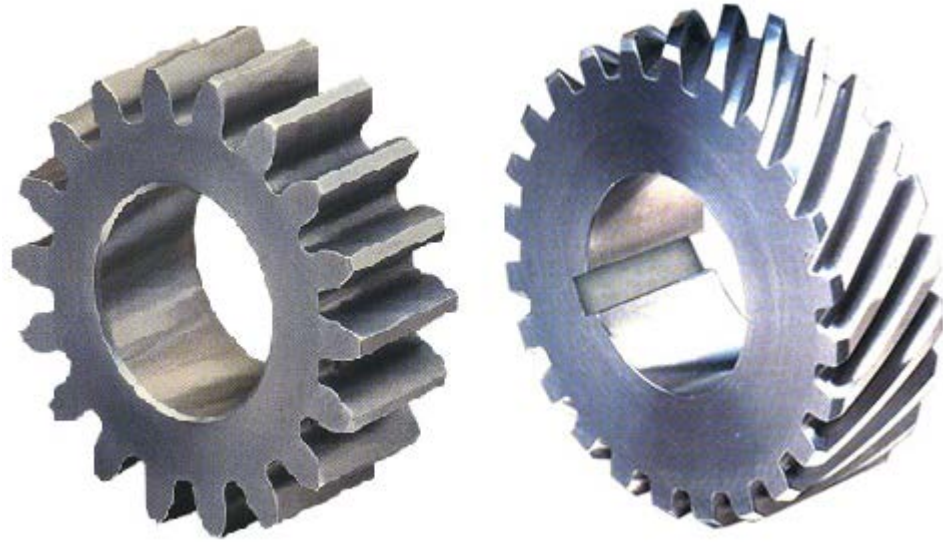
Spur Gear (Left) and Helical Gear (Right)
